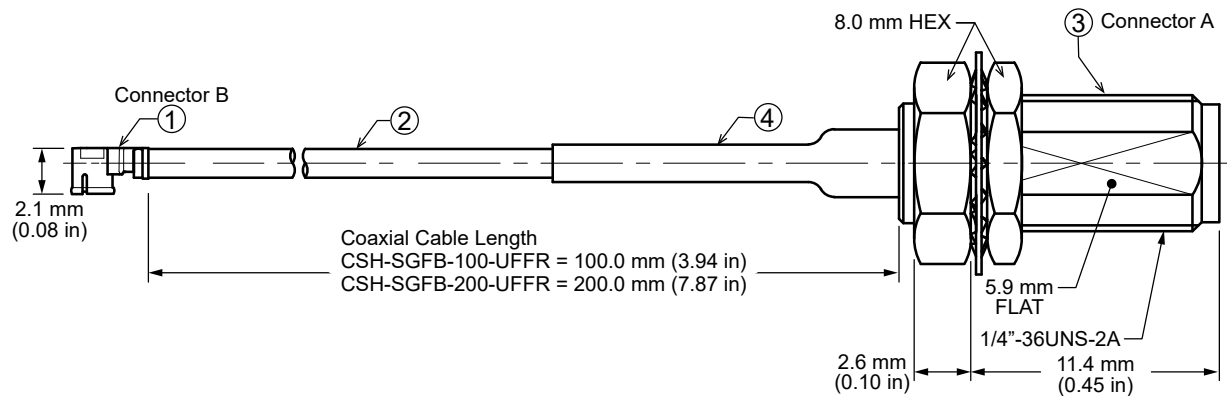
Product Dimensions for the CSH-SGFB-ccc-UFFR Cable Assembly
